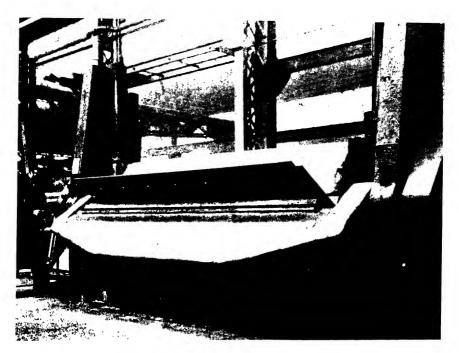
Plate Bending Machine at the Works of Cooke and Ferguson, Ltd., Manchester
